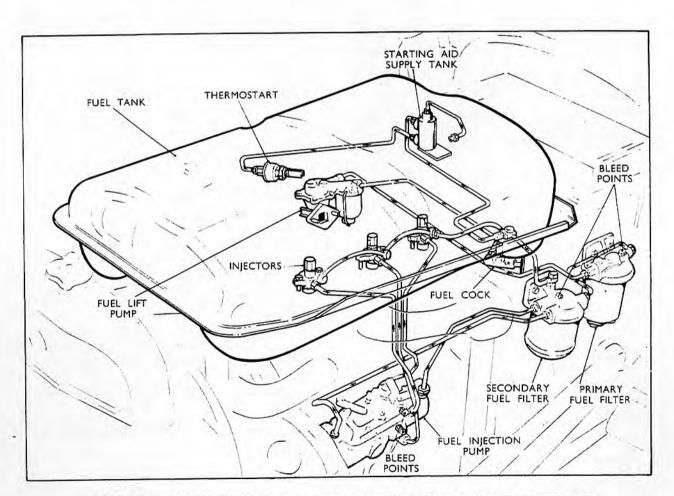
GENERAL ARRANGEMENT OF 3A-152 ENGINE FUEL SYSTEM AND COMPONENTS.
